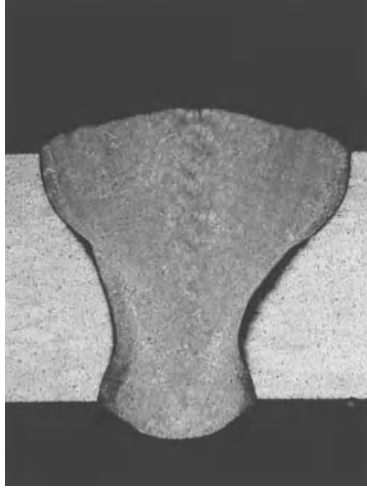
CO₂ laser beam weld of 5 mm thick aluminum alloy 6013; from [CHE 98]
